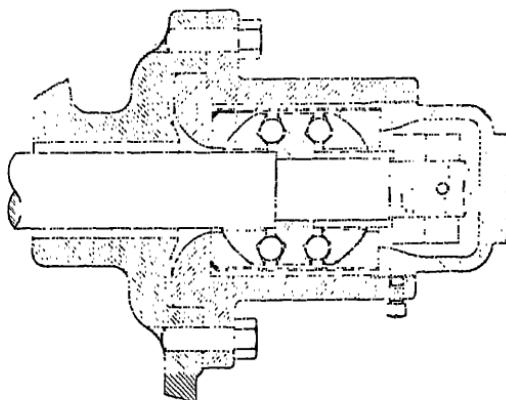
Thrust bearing, spherically seated for self-alignment. Auburn Ball Bearing Co.
